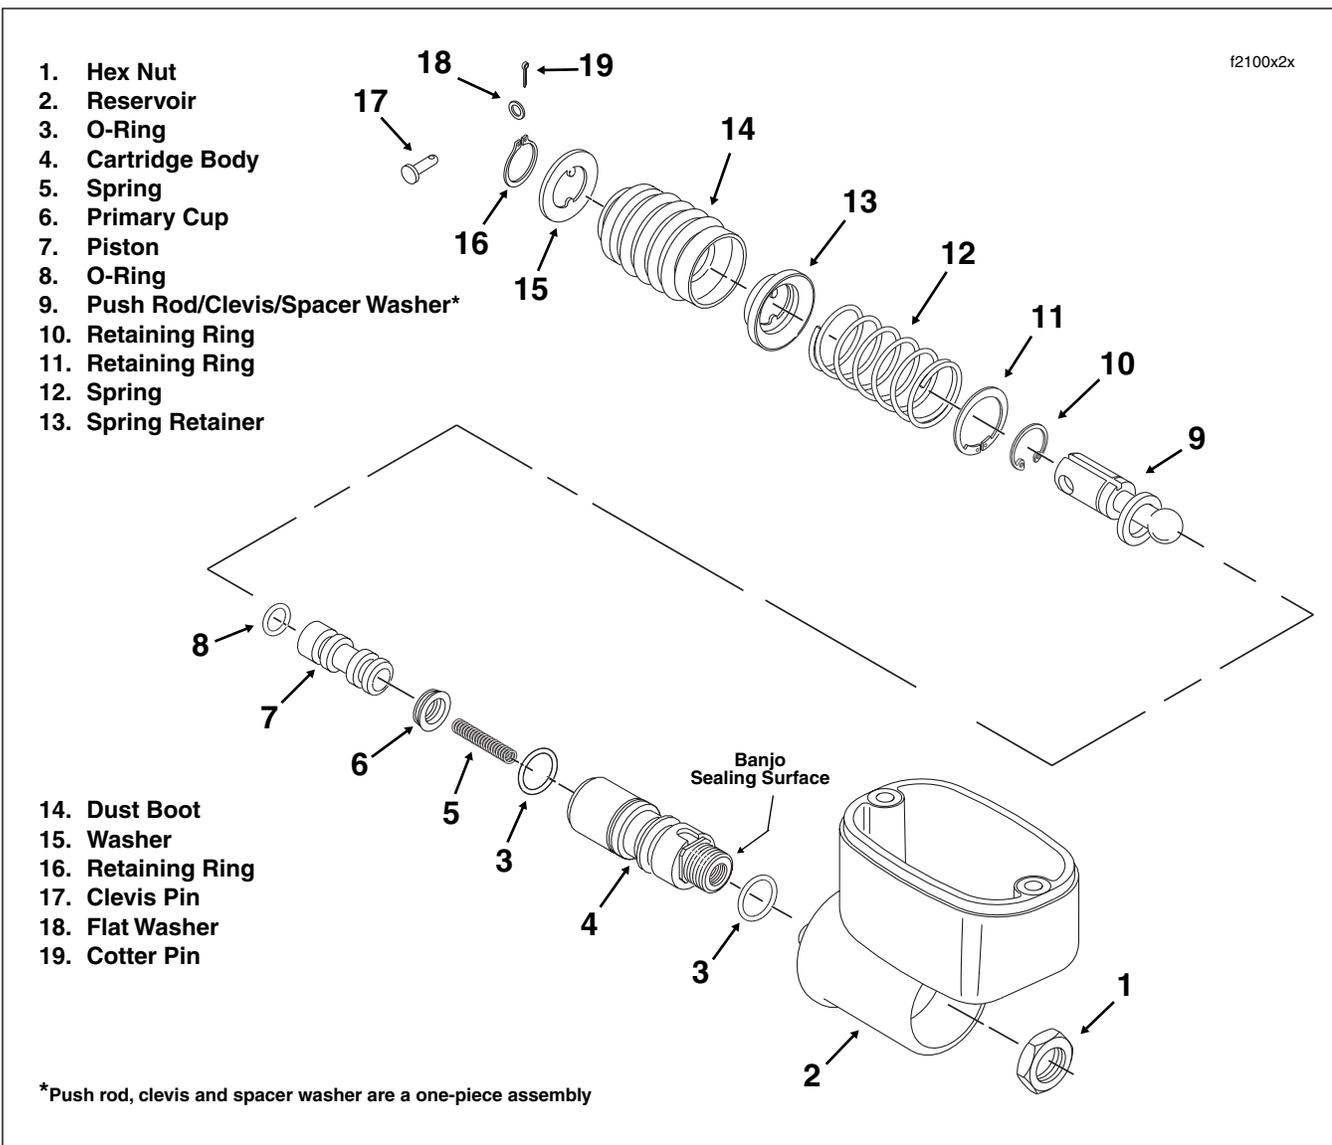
Rear Brake Master Cylinder Assembly (Exploded View)
